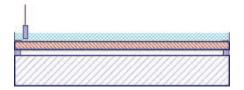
Illustration of the set-up needed for the explosive welding process.
